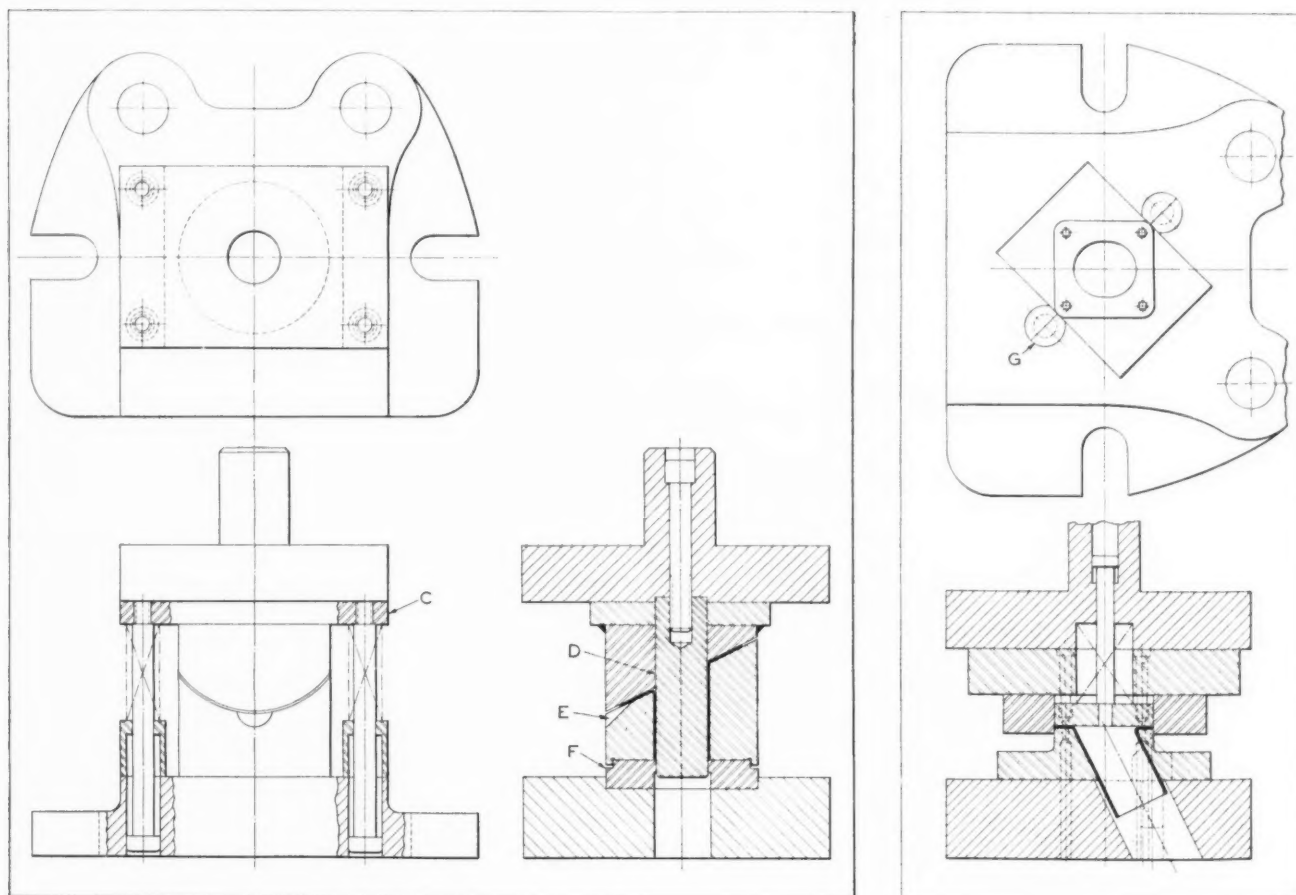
(Left) Die for Final Forming and Angular Flanging Operations on Pipe Shown in Fig. 1. Fig. 6. (Right) Die for Piercing Four Holes in Flange of Radiator Inlet Pipe and Trimming Flange to Shape Shown in Fig. 1
